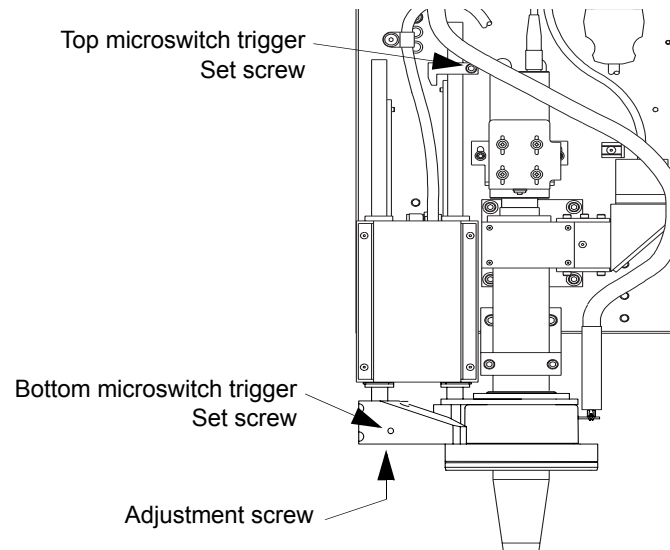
Travel Adjustment Set Screw and Adjustment Screw
